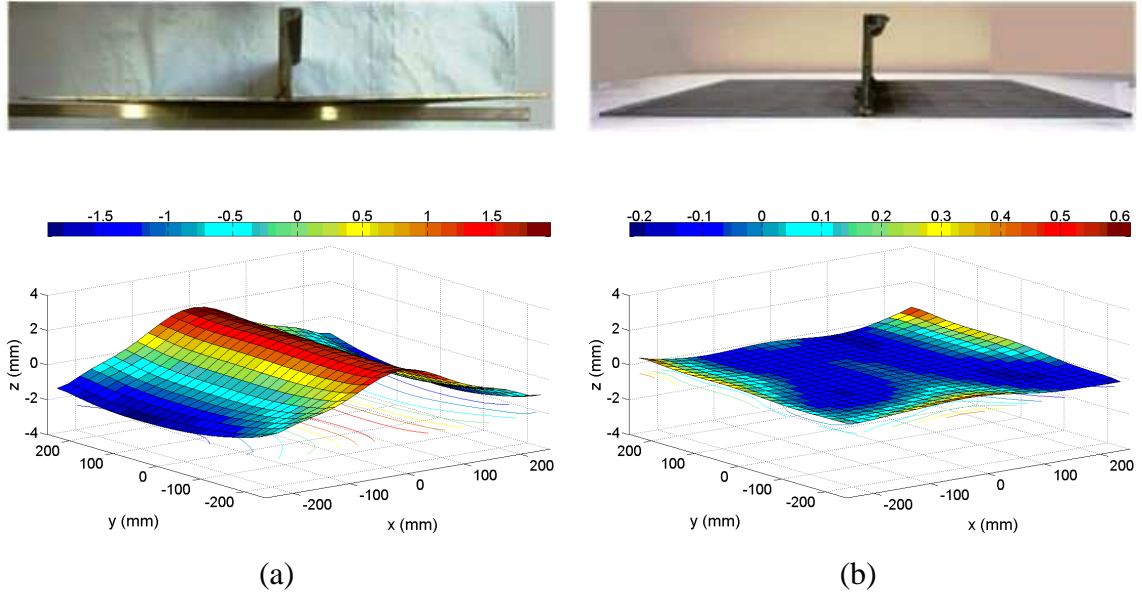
Iterative laser straightened DH36 plate with fillet welded stringer; (a) Distorted shape after welding; (b) Final shape after 4 iterations; (supplied by the BAE-shipyard in Govan). The colour scale of the vertical z -deflection is in [mm].
